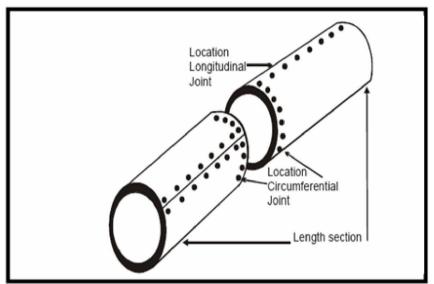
Longitudinal and Circumferential Location for Riveted Joints
